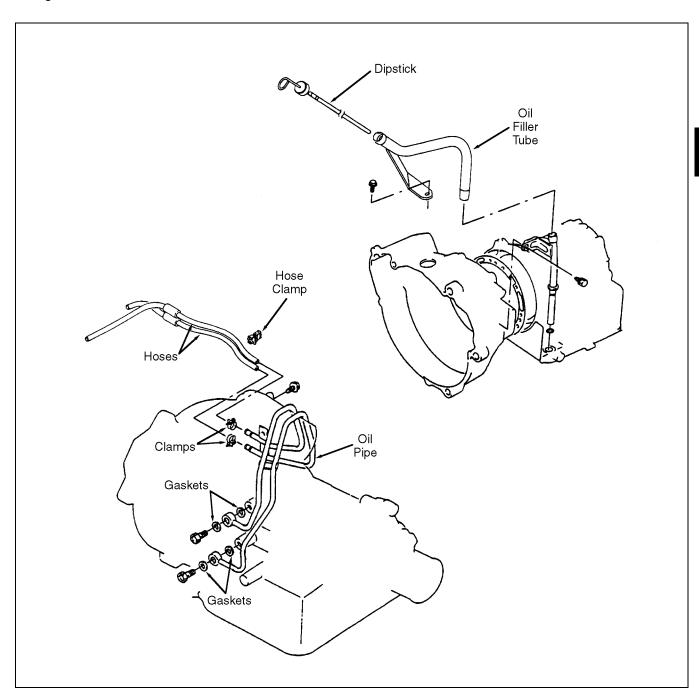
J-4. Fluid Tubes and Hoses Removal and Installation
